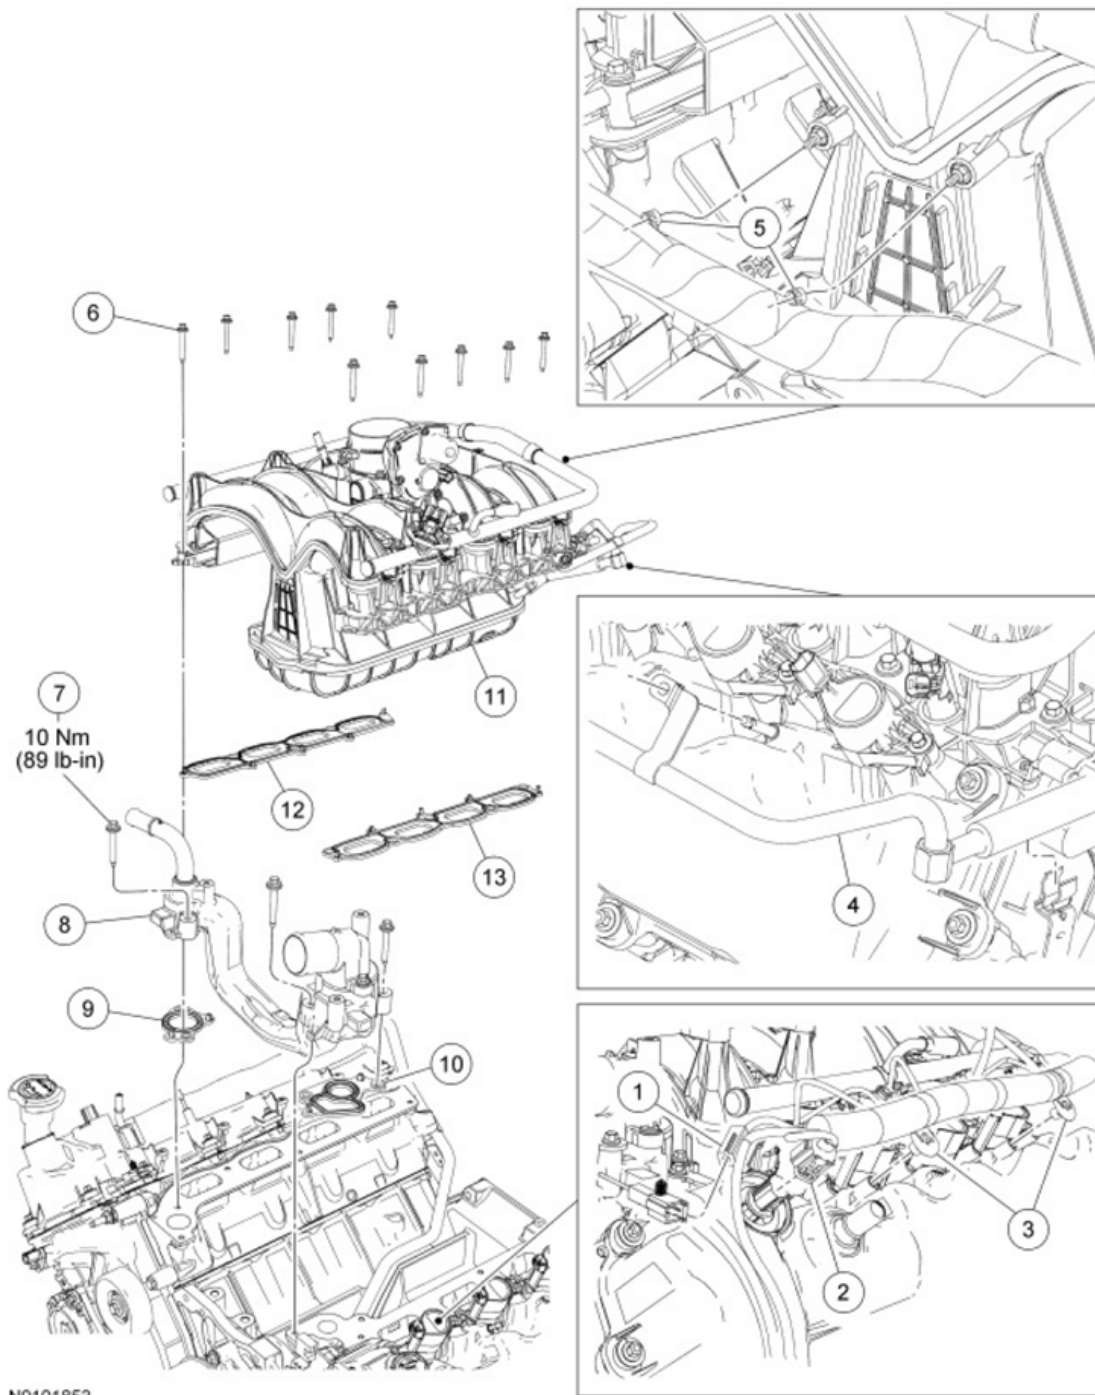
Identifying Engine Coolant Crossover Manifold Assembly And Intake Manifold And Gaskets With Torque Specifications
